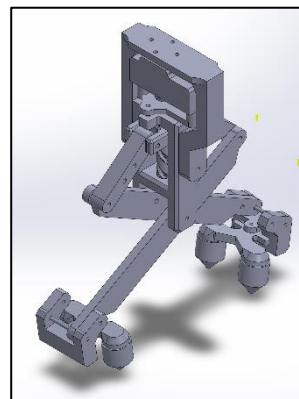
Grabber mechanism bolt hole placement, all heads are accessible when fully assembled - both with 3D printed and laser cut parts.
